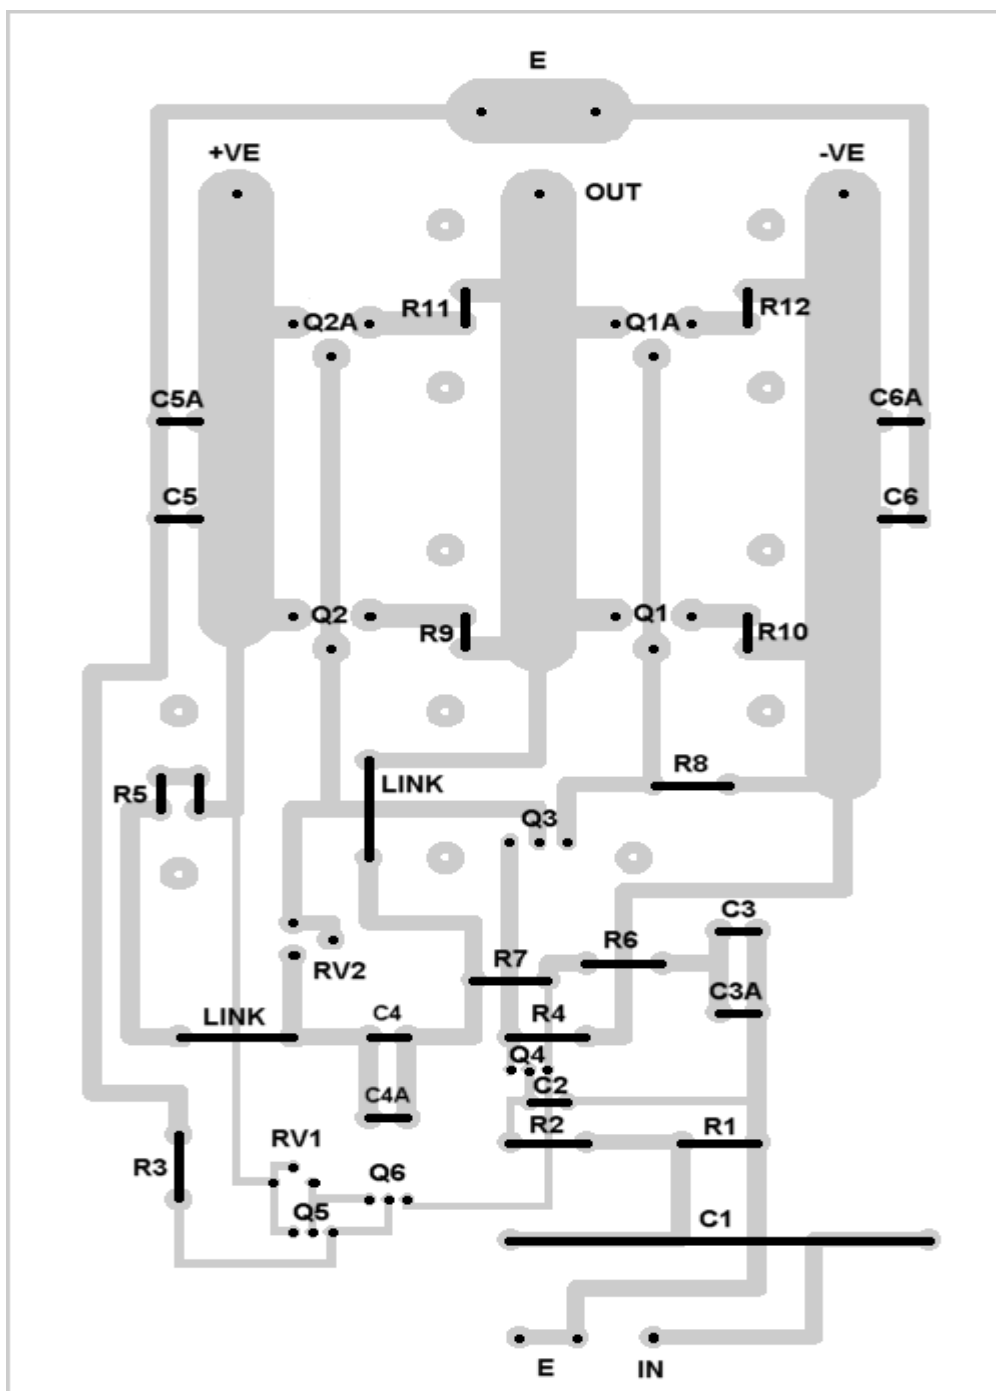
Amplifier pcb overlay (viewed from component side)
